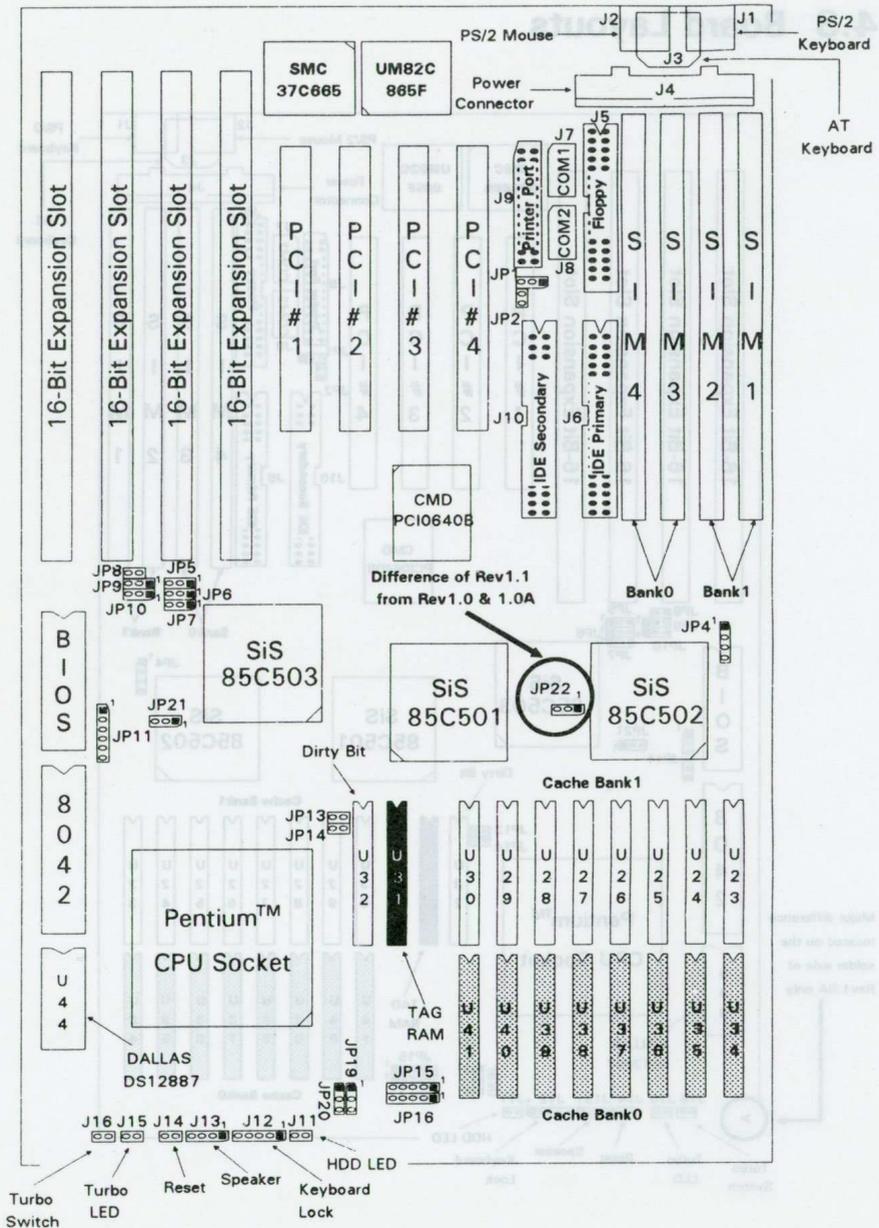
SI5PI AIO Mainboard Layout (PCB Rev. 1.1)
